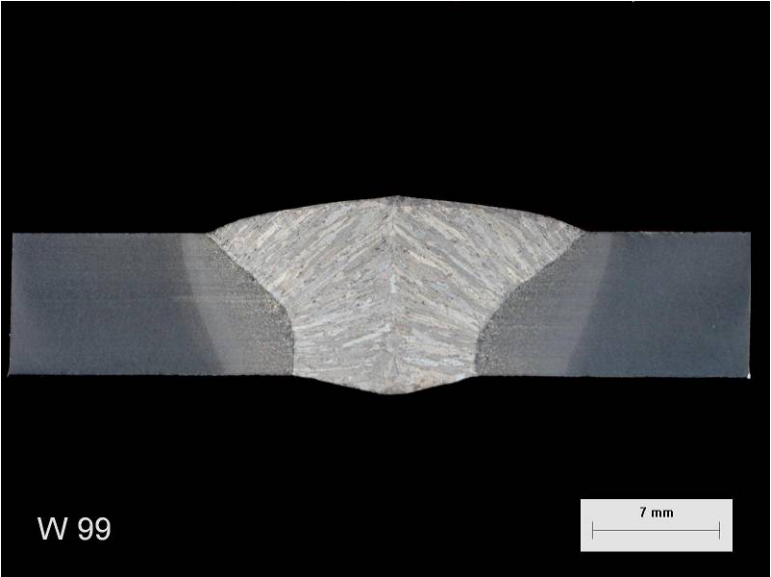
Weld with 8-mm Procedures and 2.0-mm Root Opening
